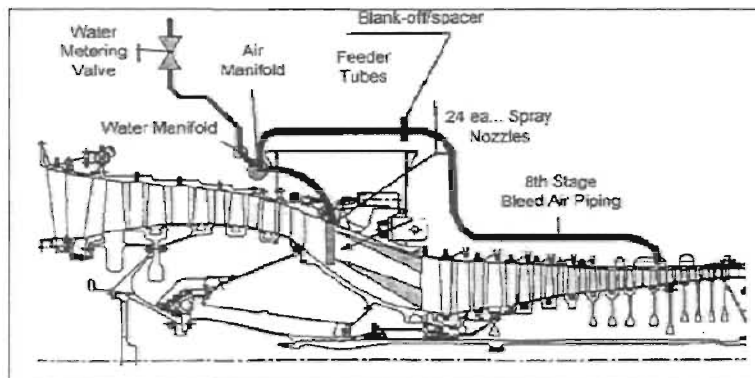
Half Section View of LM6000 Gas Turbine Compressor Section³
